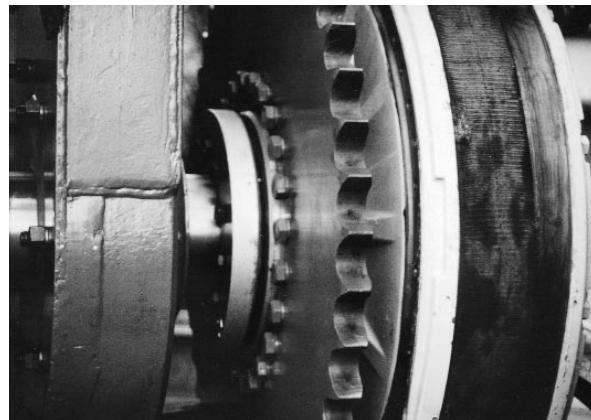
· RINGFEDER® Shrink Disc · Double clamping
